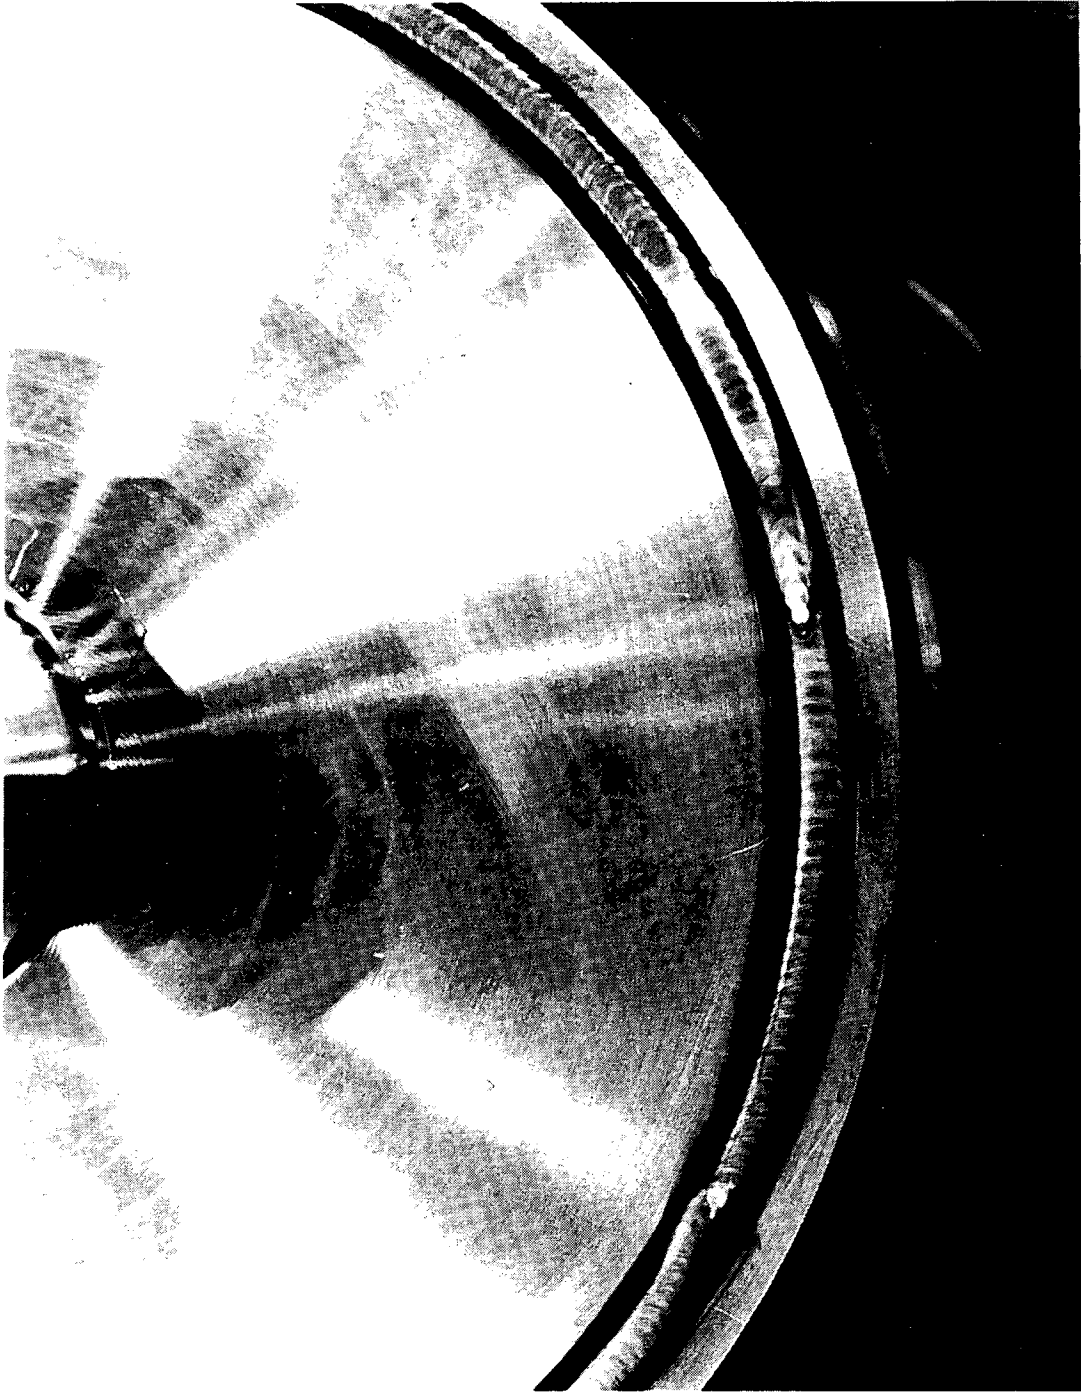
Close-up of Skewed Weld Area
